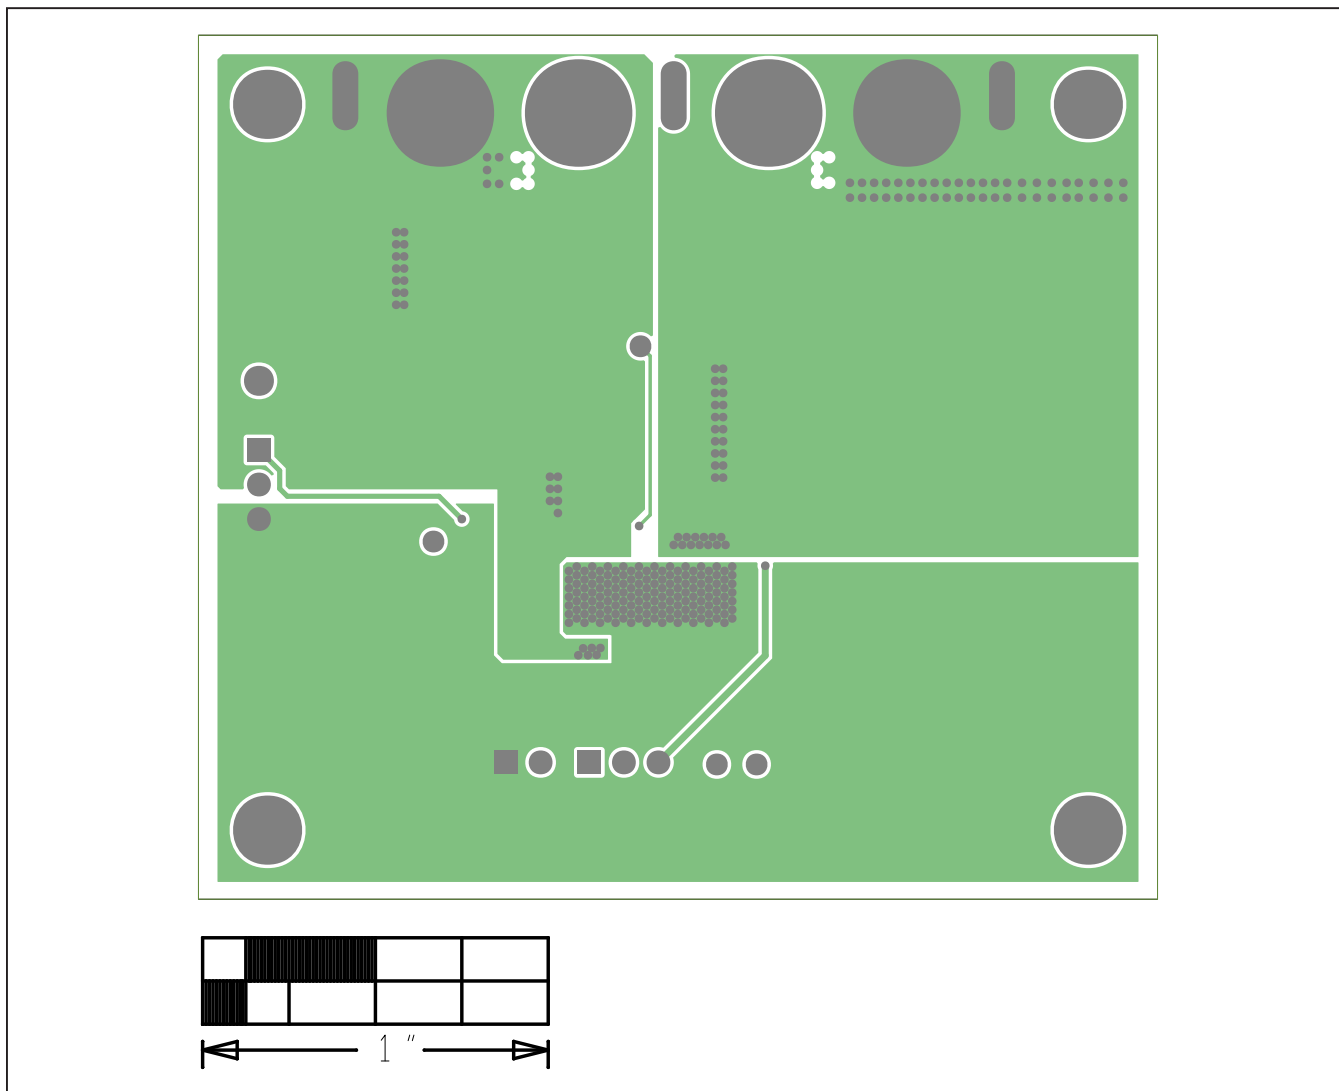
MAXM17546 5V Output EV kit PCB Layout—Layer 3
